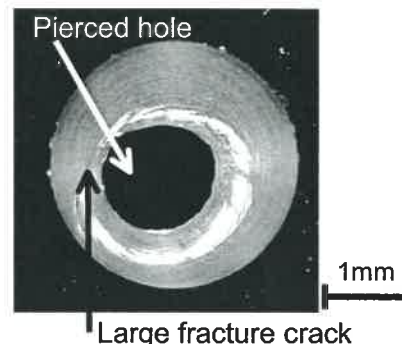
Appearance of pierced hole and large fracture crack from view of the exit surface at drilling depth of 2.7mm
